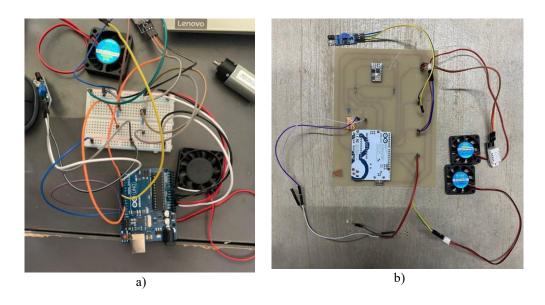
a) Breadboard component construction, b) PCB Board component construction
